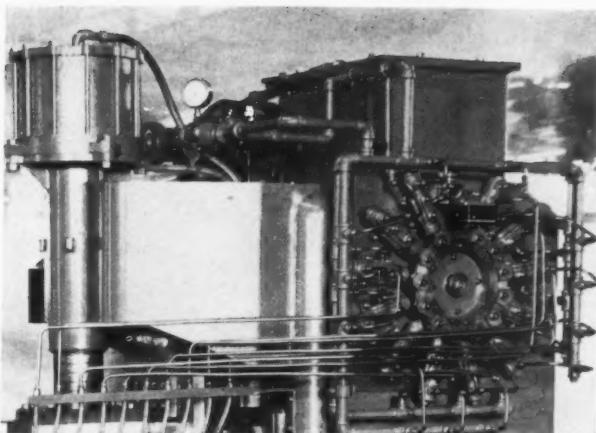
Control for automatic welder has the appearance of a radial aircraft engine
